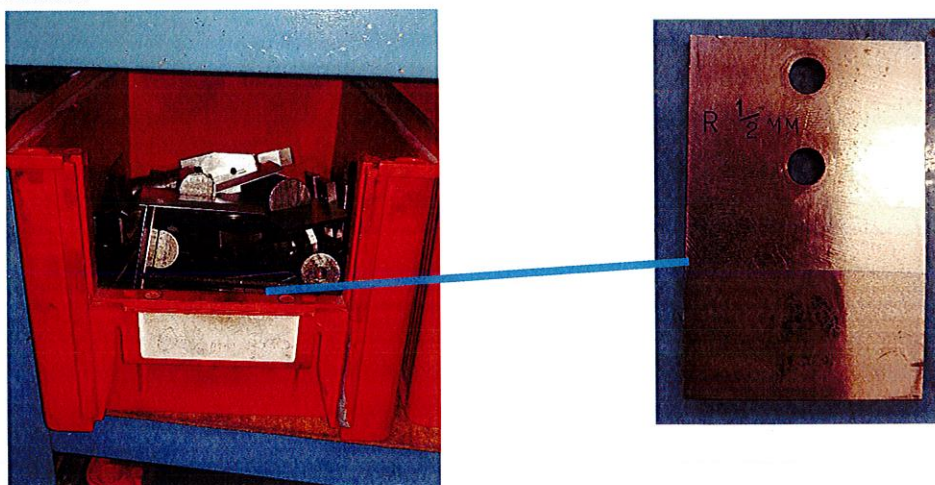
This tub is marked 0.2mm Rad found on H Section racking. Tool needed is highlighted to the right.
